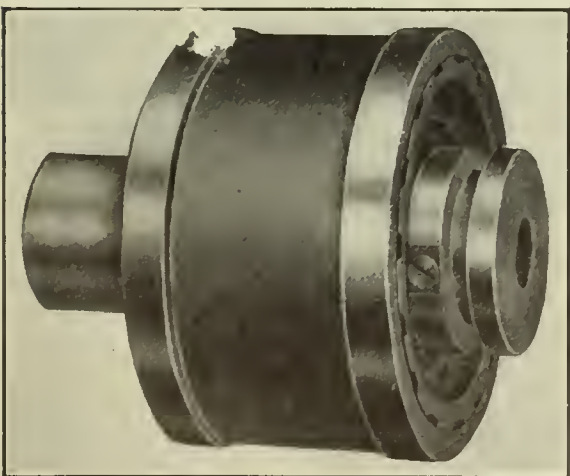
EXTERIOR OF AKRON CLUTCH COUPLING
